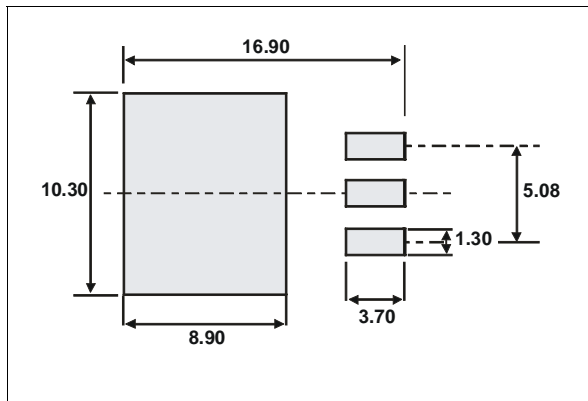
D²PAK Foot Print Dimensions (in millimeters)
